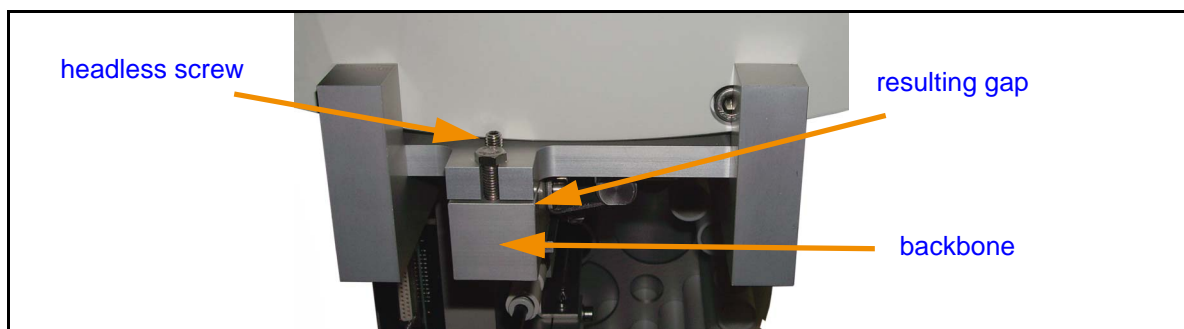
Bottom up view of the carousel adjusted with headless screw
